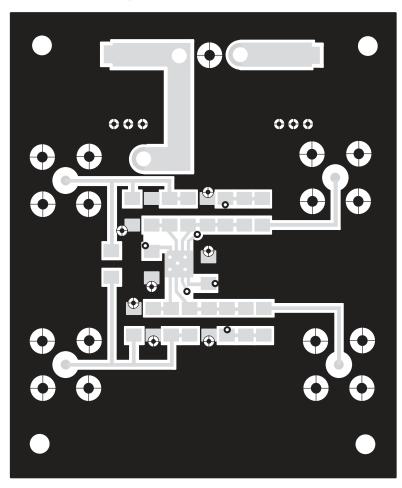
THS4052 EVM PC Board Layout – Component Side
